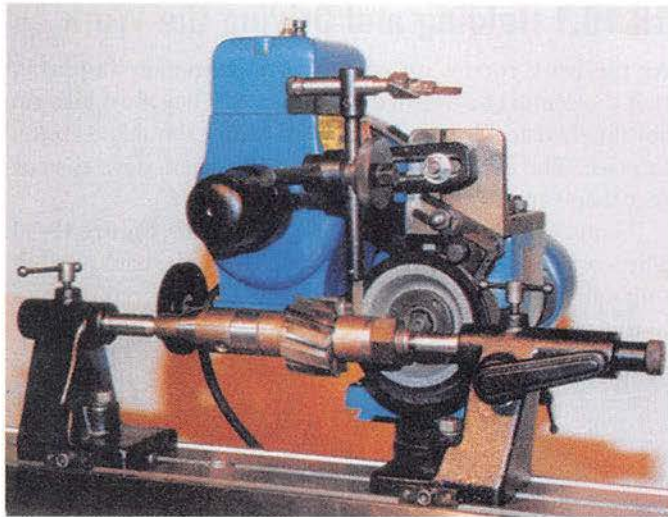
An indexing disc is often used to position each tooth for sharpening.
